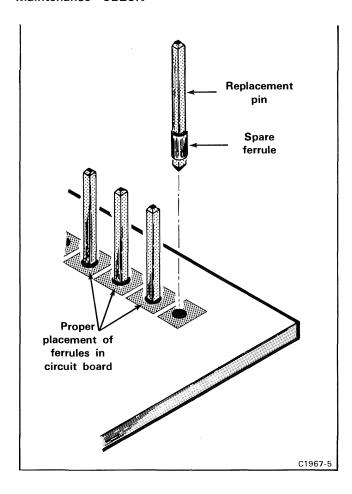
Exploded view of circuit-board pin and ferrule.
